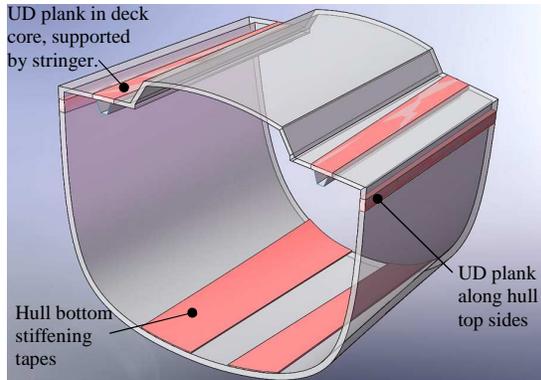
Hull girder stiffening tapes showing UD planks along the deck
